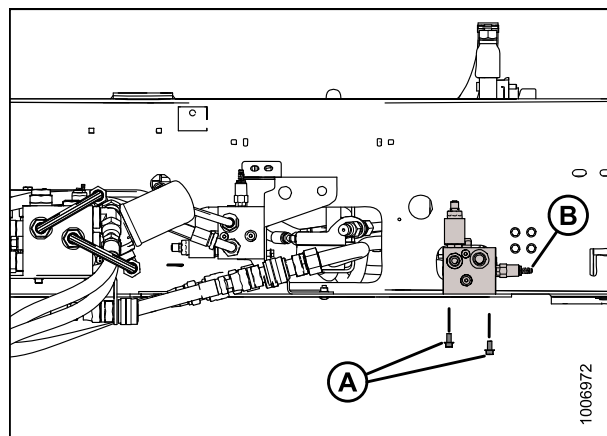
Windrower Left-Hand Side (M205 Shown)
